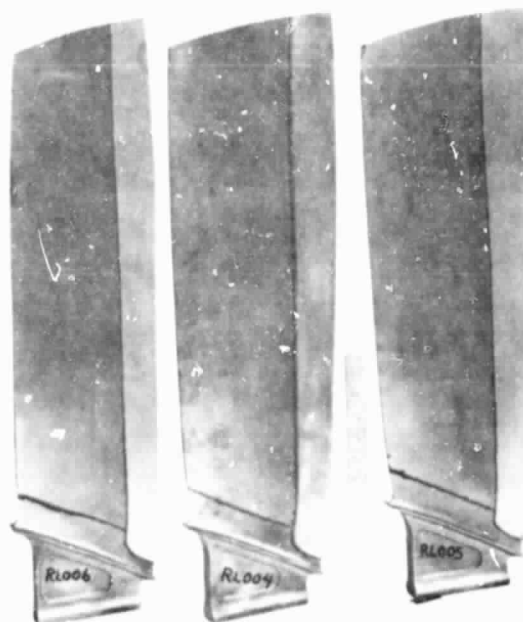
Superhybrid ticore blades after construction (convex surfaces).
